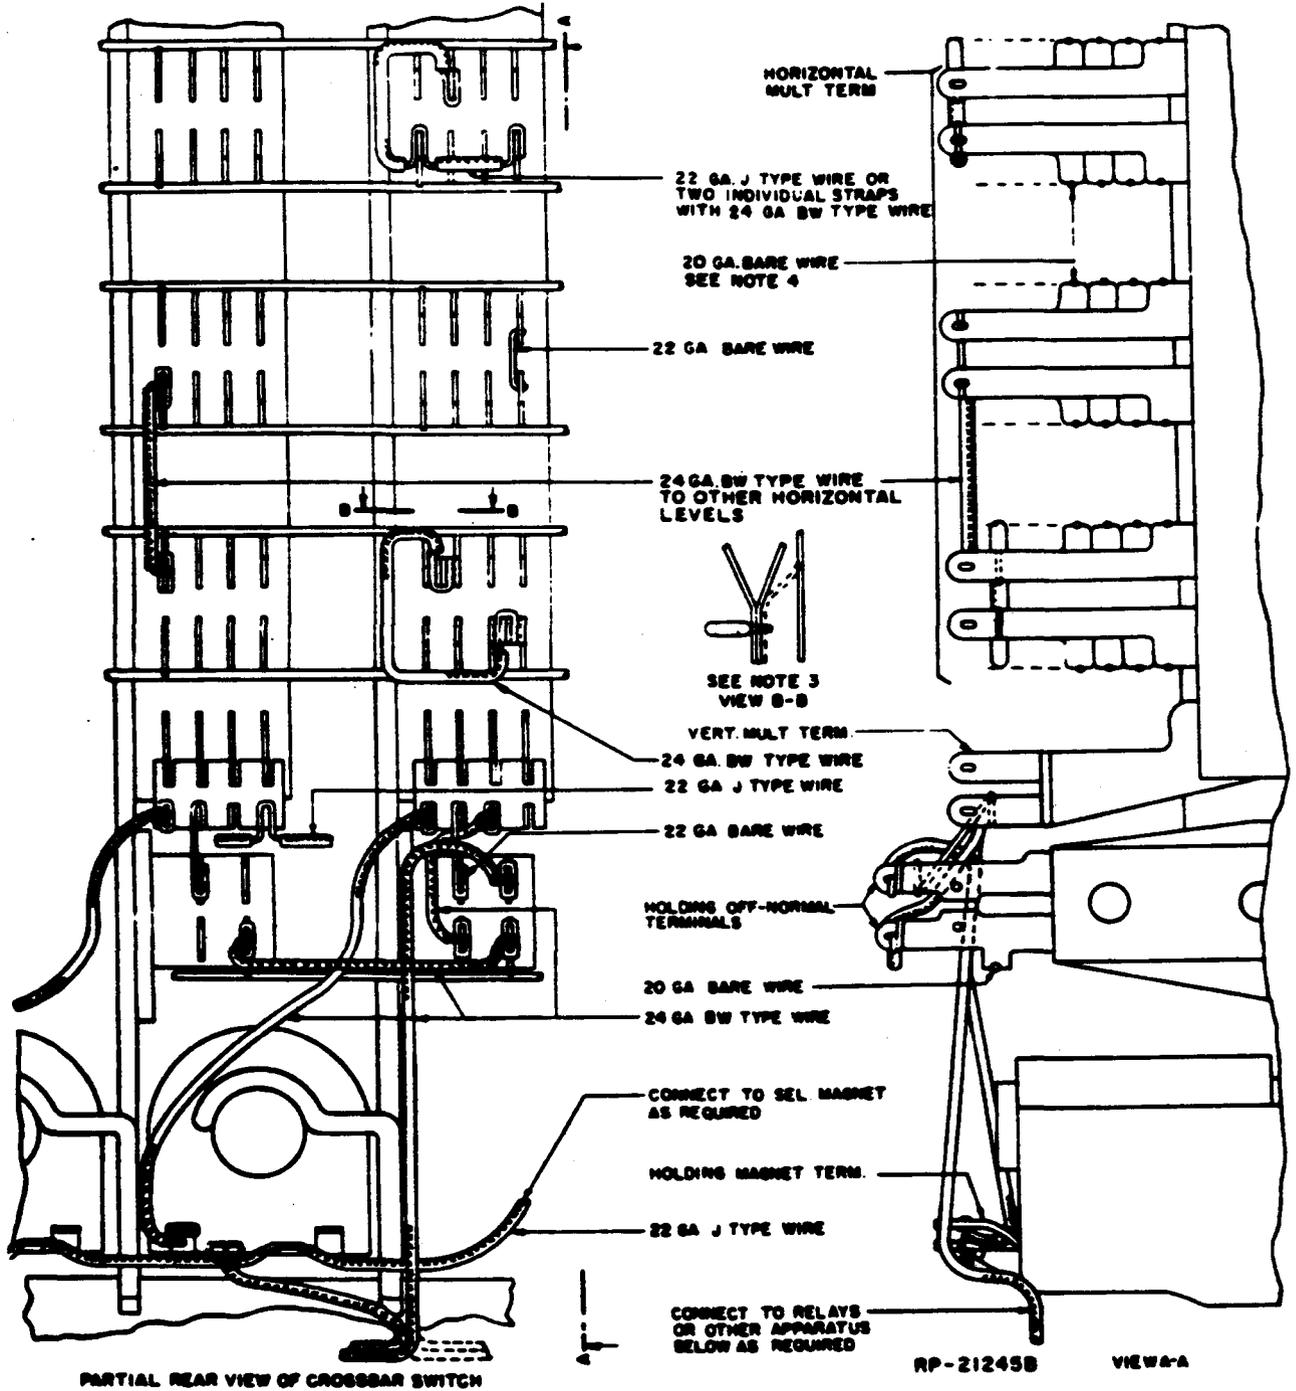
CROSSBAR SWITCH VERTICAL STRAPPING (PAR. 2.172)
